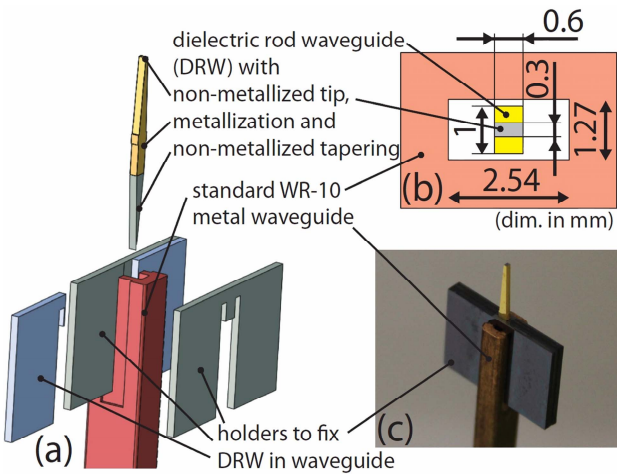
Design of the DRW probe and its fixture in a standard metal waveguide: (a) exploded CAD drawing (b) schematic top view (c) photograph of device used for measurements.
